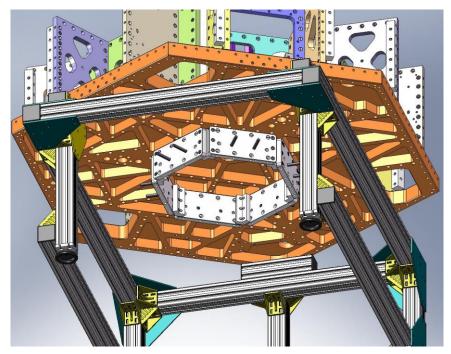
120 Brackets installed inside the Keel. All screws should be snug, so mating surfaces are all in good contact.
